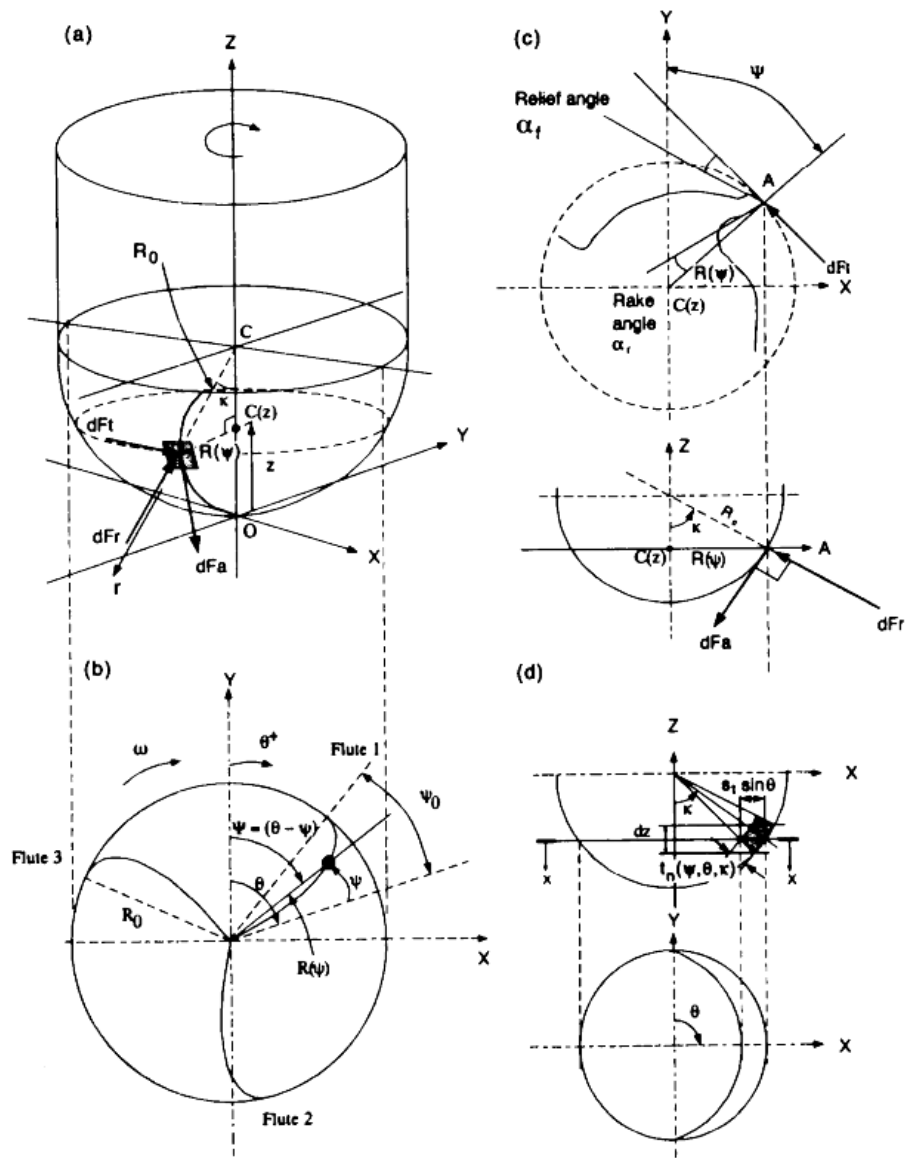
Geometry and tool coordinates for a ball milling cutter [17]
